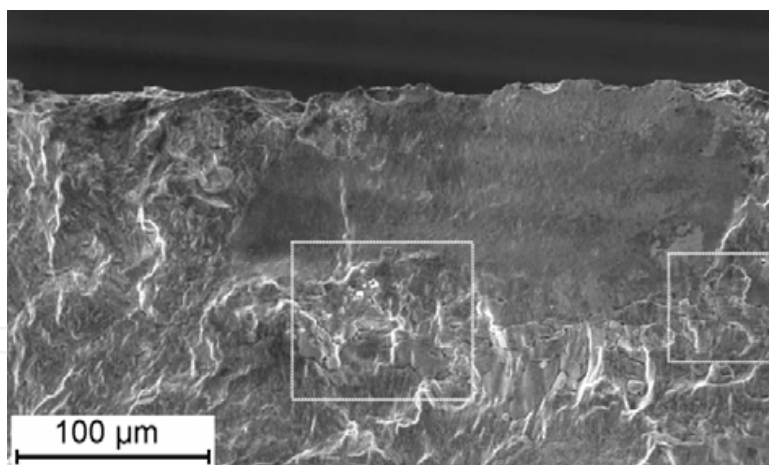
SEM-SE fractograph of the original fracture surface of a preparatively opened axial crack on the inner ring raceway of a failed taper roller bearing from an industrial gearbox
